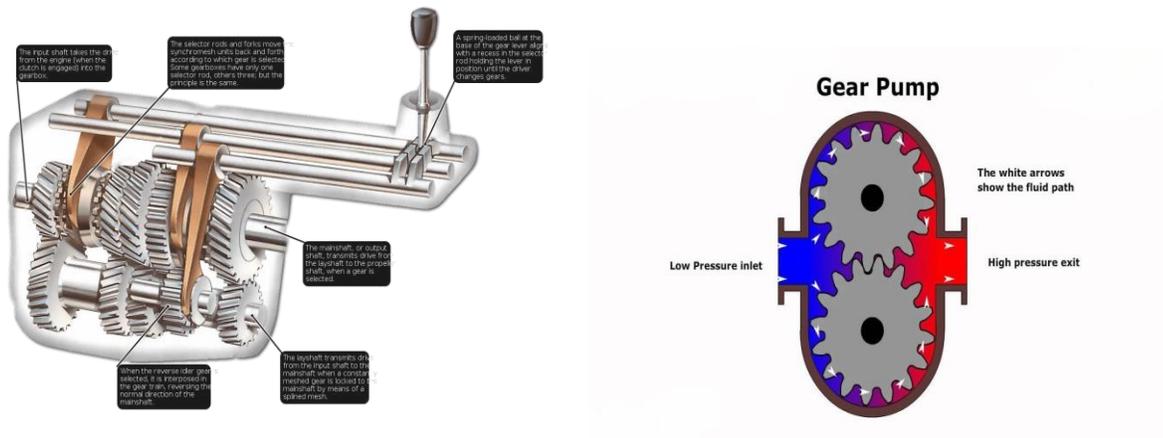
iii) shows Gear arrangement of Gear-Box Fig3.2.iv) shows a Gear-Pump
